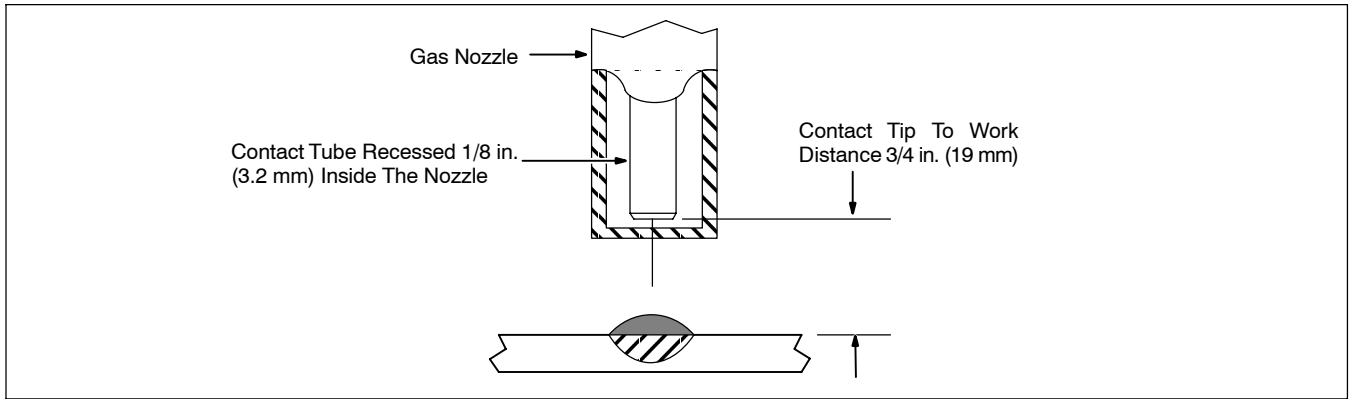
Contact Tube Position And Tip-To-Work Distance
